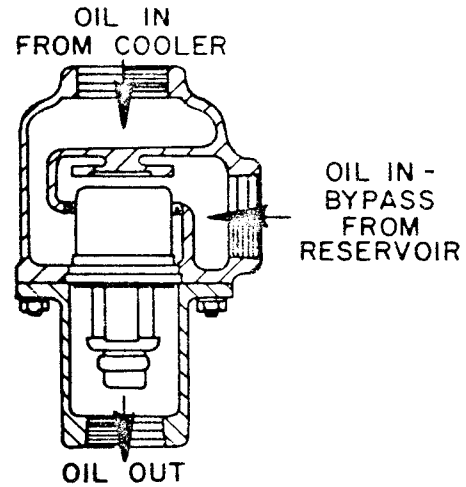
B — THERMOSTATIC MIXING VALVE
